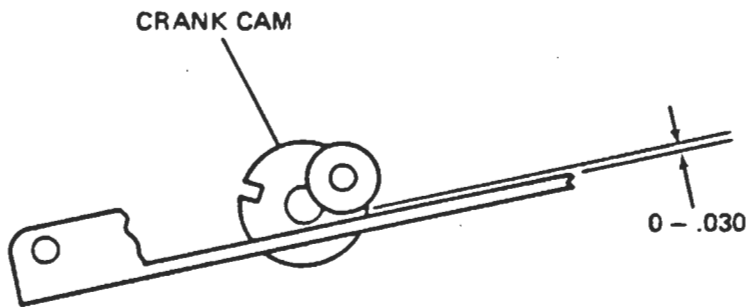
A. Eject Motor Cam Alignment Check - Carrier Open
